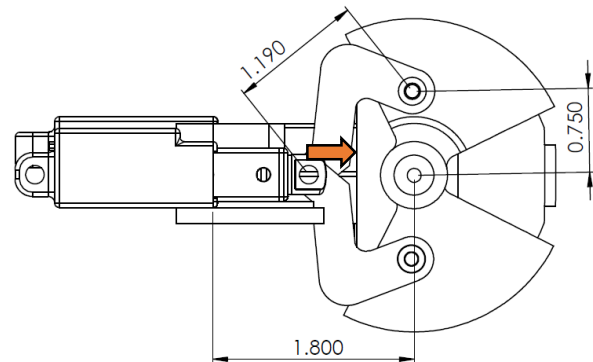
Dimensioned drawing of eyelid mechanism. Arrow indicates the positive direction of actuating the eyelid motor
